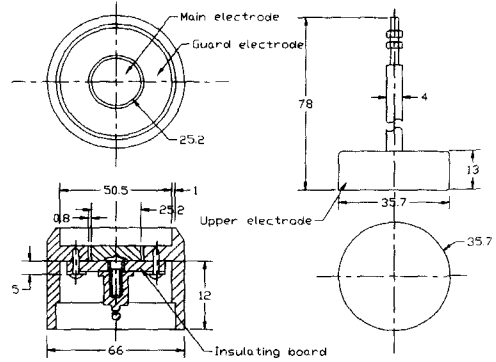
Shape and dimensions of measuring electrodes (unit : mm)
